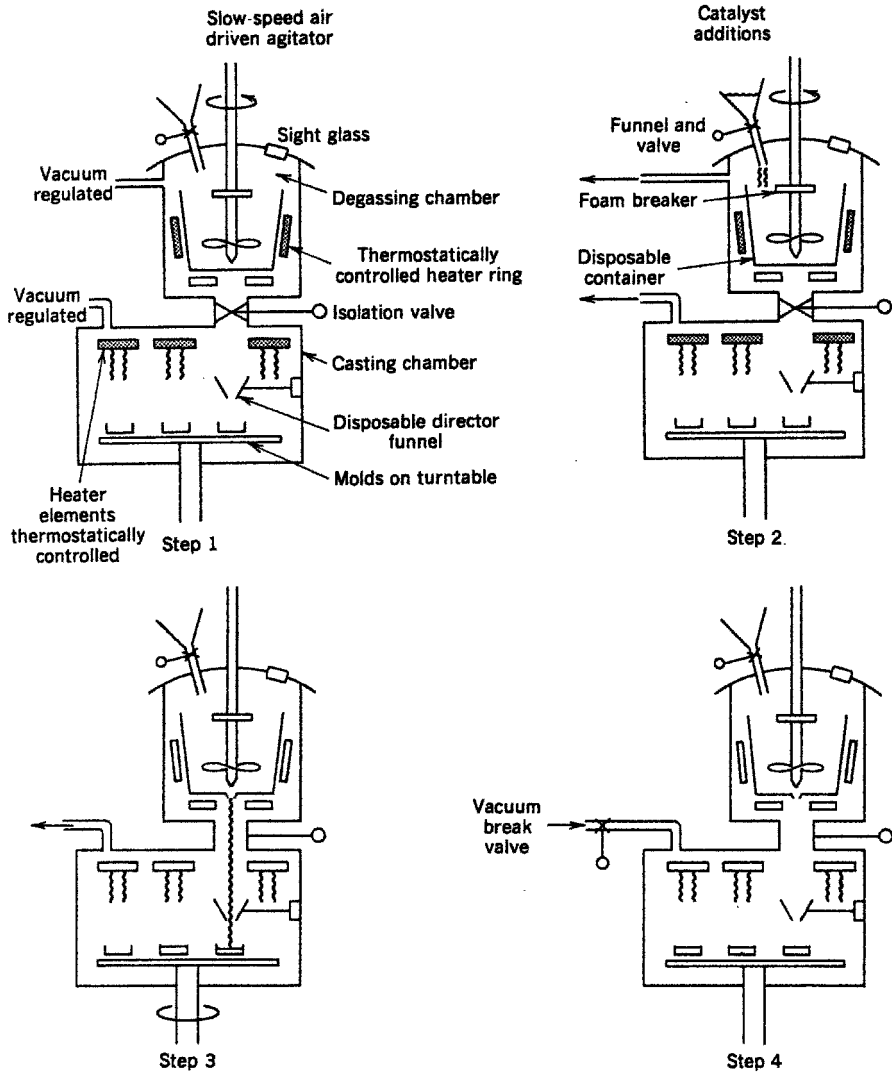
Vacuum-pressure potter showing the four steps of the degassing and casting process, from blending resin components through cure.
